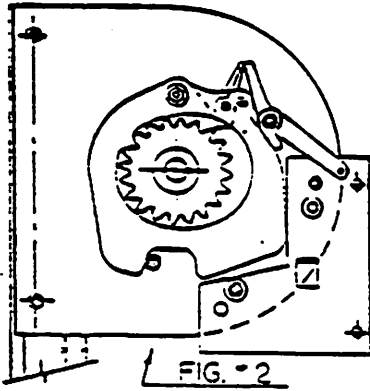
Disassemble 'Hoist Mounting' Plate, remove two arms. Bolt 'Hoist Mounting' Plate to side of bracket using 3/8 x 1/2" button socket head screws, nuts, and washers. Do not tighten screws in place yet, allowing for adjustment. The governor should swing free of the 'Hoist Mounting' Plate.
